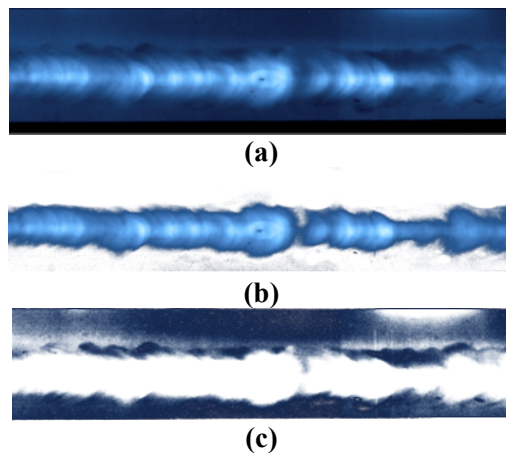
(a) Radiography film image (b) cluster of the weld inside (c) cluster of weld side
